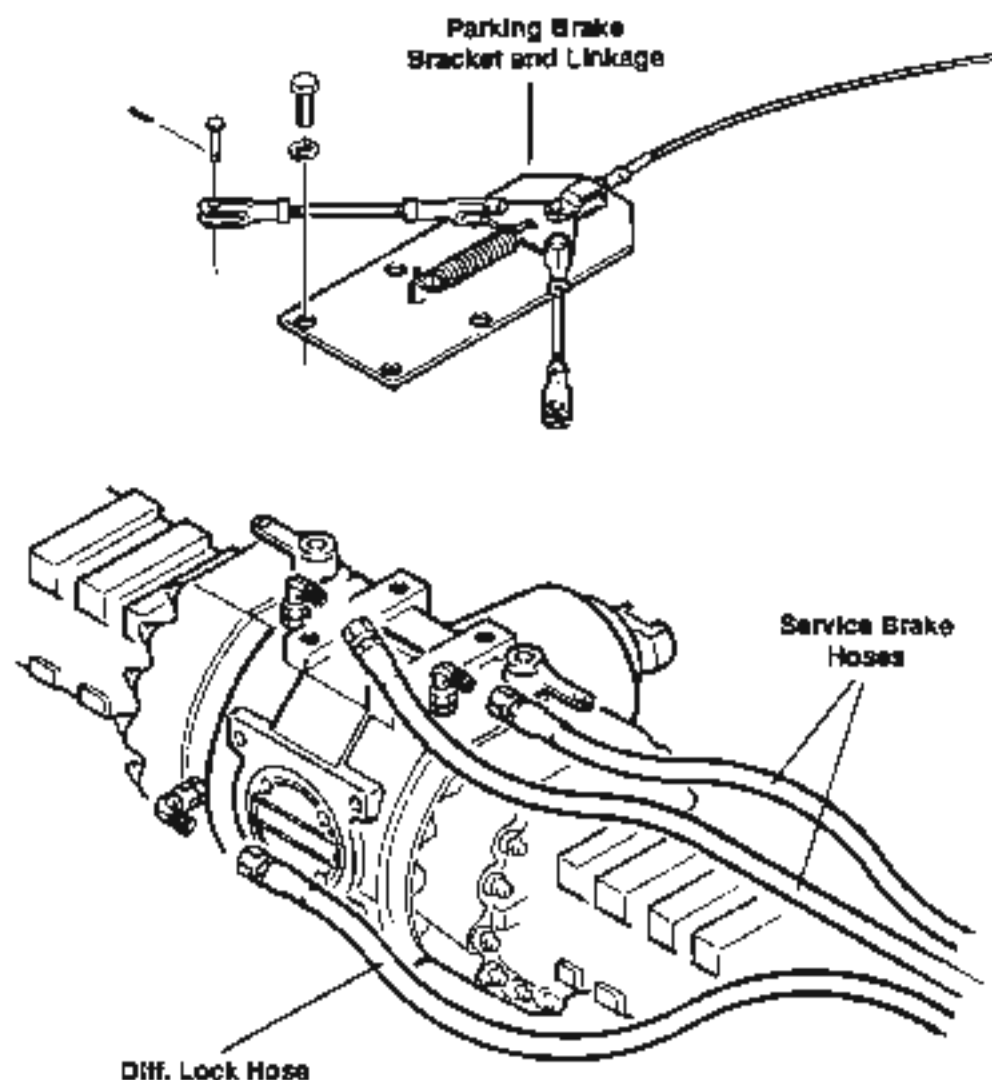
Hydraulic Hose and Parking Brake Assembly - Front Axle (Model 522, 522/4)
